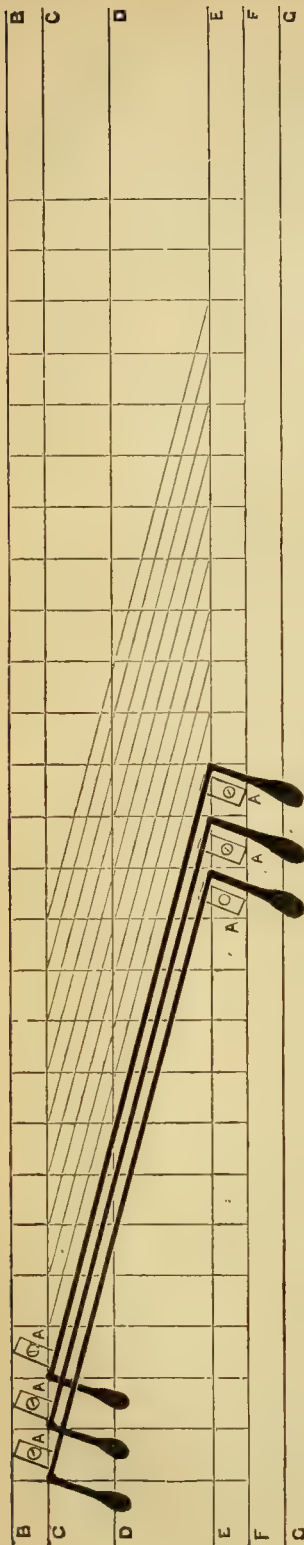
COUPLER BASEBOARD, HALF SIZE.—A, Blocks; B B, Back Edge of Baseboard; C C, Back Gauge Line; D D, Line of Coupler Screws; E E, Front Gauge Line; F F, Front Edge of Baseboard; G G, Line of Stem Screws.
